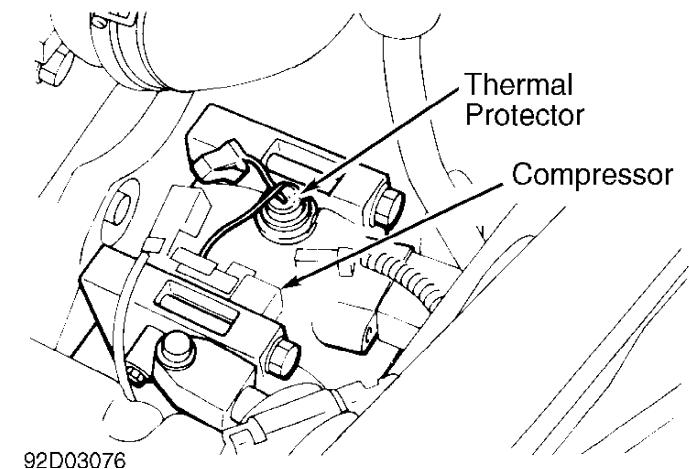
Locating Thermal Protector Courtesy of Nissan Motor Co., U.S.A.
